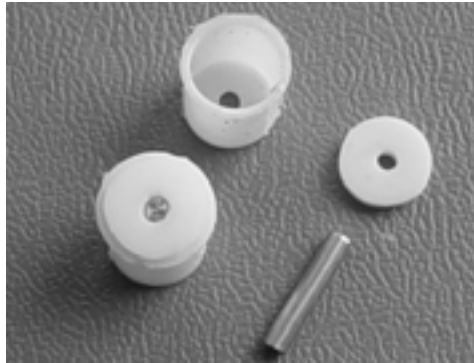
From top clockwise: silicone mould, silicone lid, 3-mm rod, and assembled mould.
